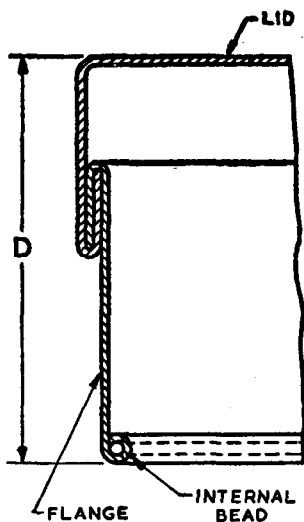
SECTION OF LID SHOWING METHOD OF SEAMING ON FLANGE AND FORM OF INTERNAL BEAD
